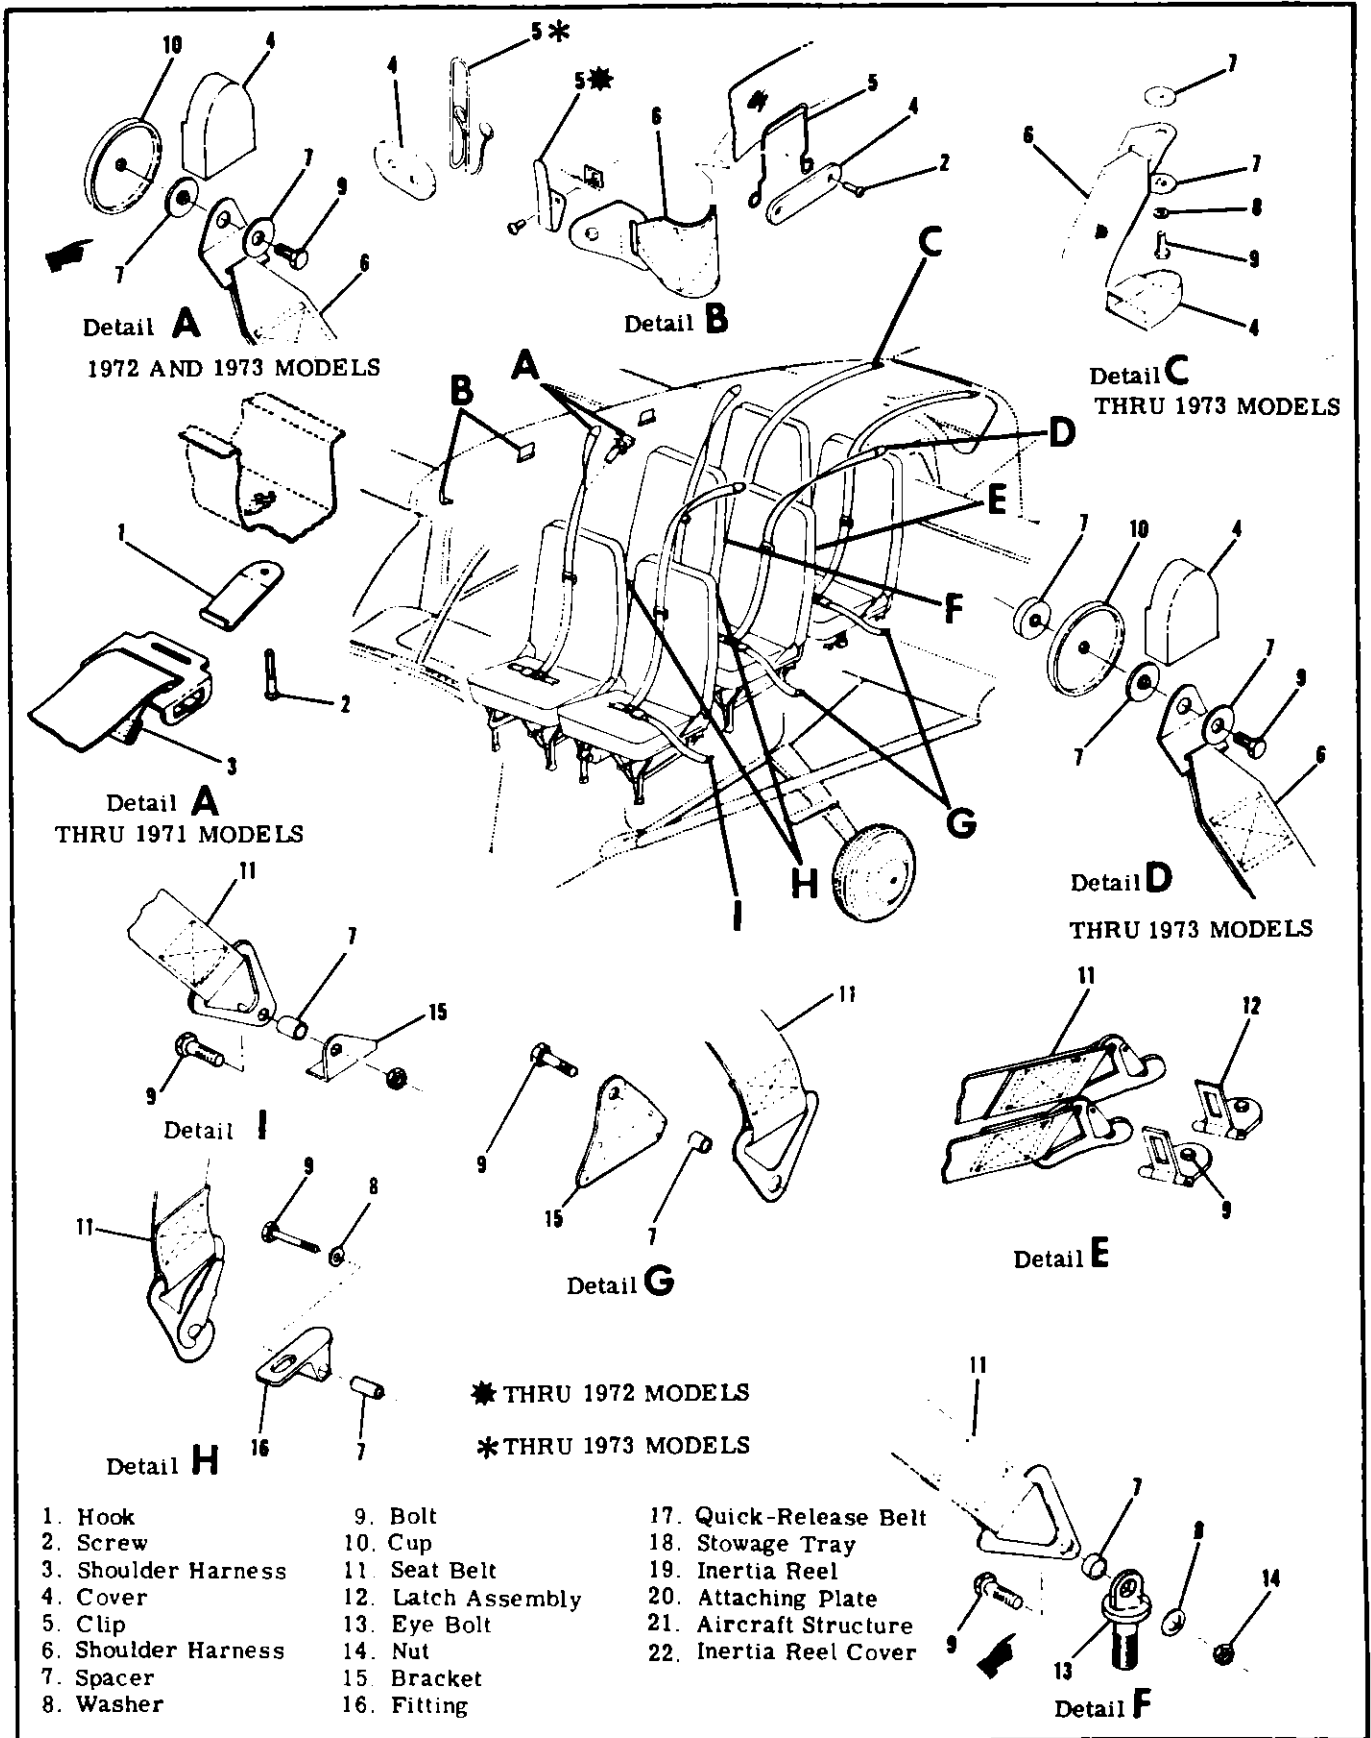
Seat Belt and Shoulder Harness Installation (Sheet 1 of 3)
